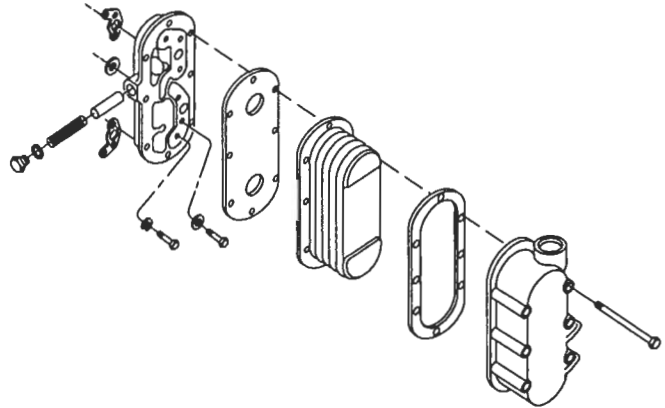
Lubricating Oil Cooler and Bypass Valve Components
